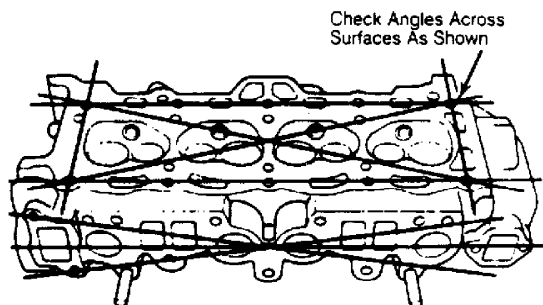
Checking Cylinder Head for Warpage - Typical
